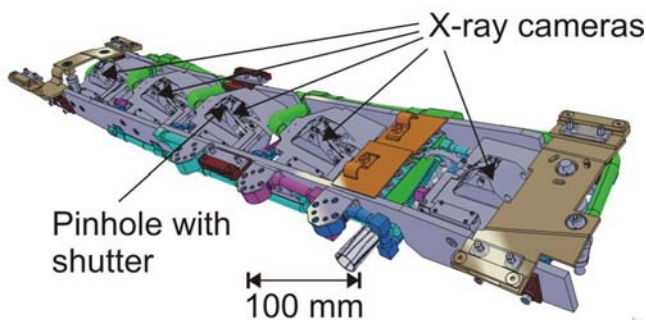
CAD view of one section of the x-ray multi camera tomography system (XMCTS).
